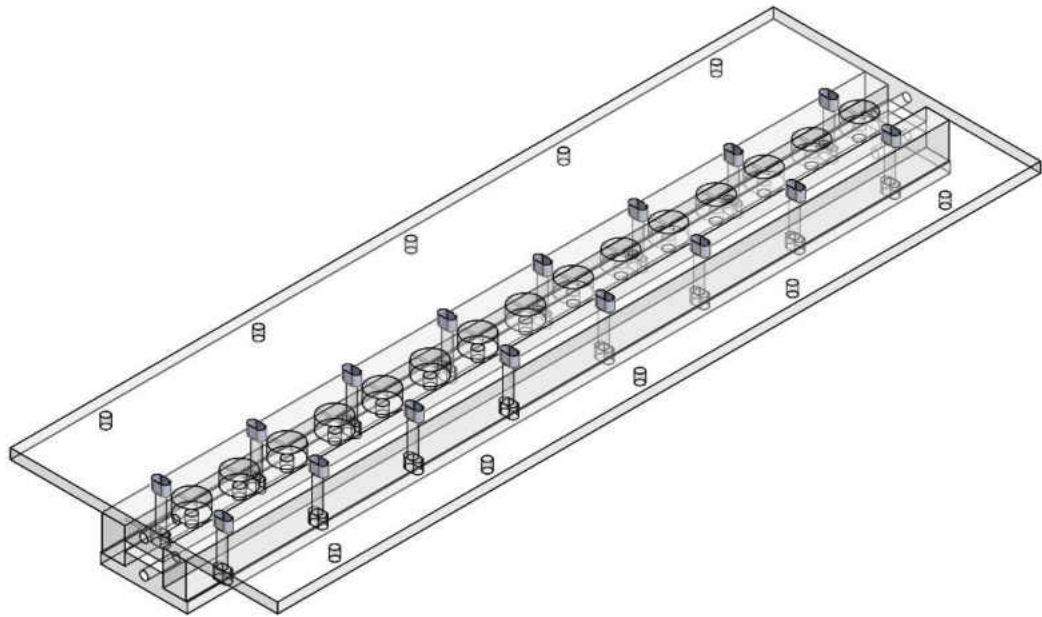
Isometric view of $Z/D=1$ impingement channel CAD
